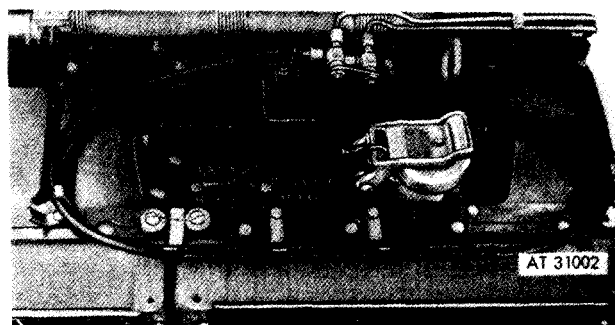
Oil level indicator tube upper cover plate-relocated oil filler tube modified installed view.
